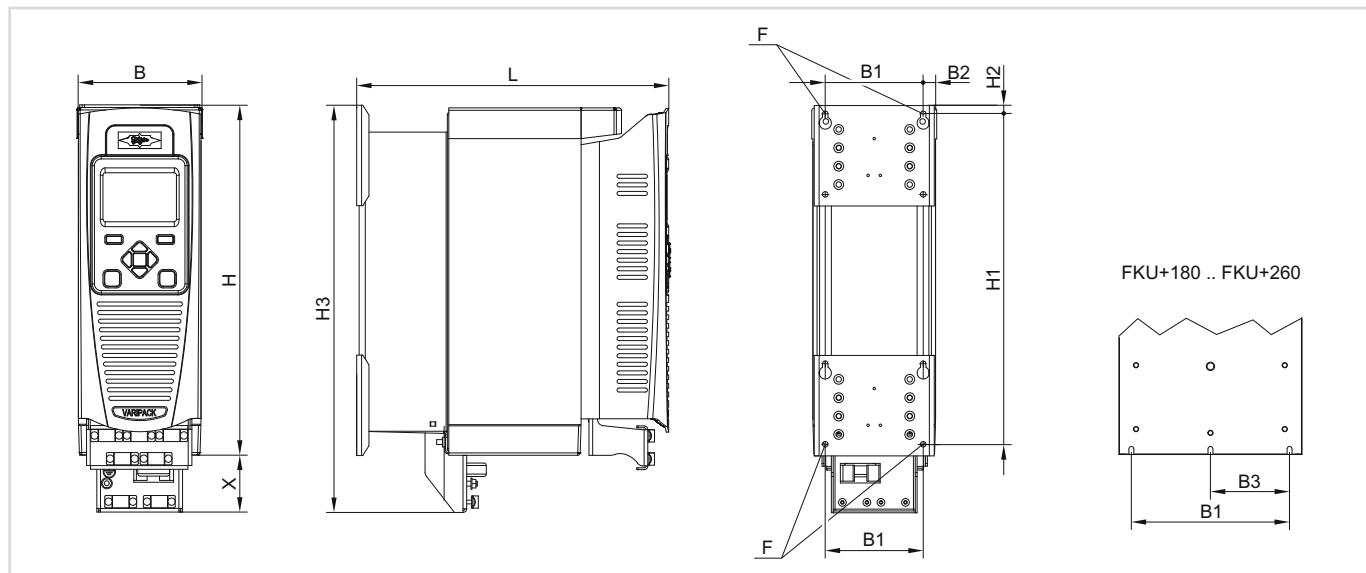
Dimensional drawings FDU+6 .. FKU+260 for switch cabinet mounting (drawing shows FDU with optional control panel)
